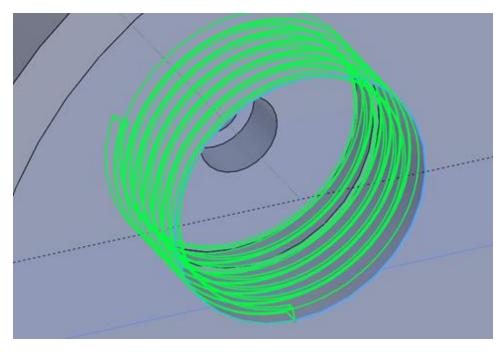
Screen captures from SOLIDWORKS the thread tool set to 16 thread per inch with .004 thick threads.
